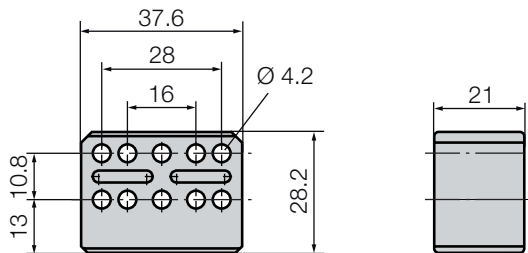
Installation dimensions for BTL6-A-3800-2
